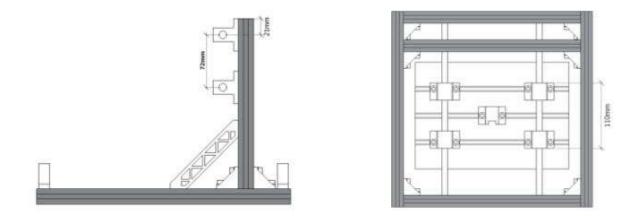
X and Y axis supports for stepper motors along with rod rails [8]
